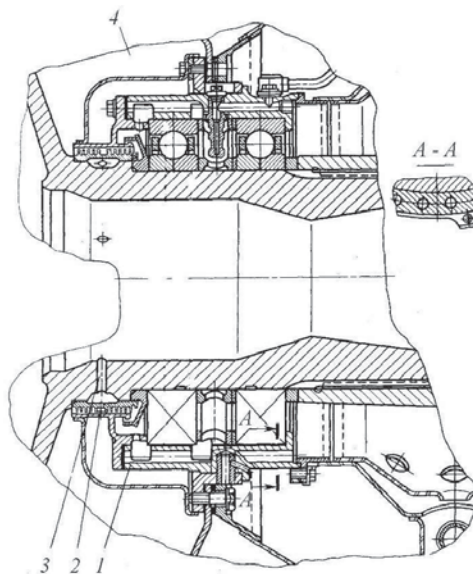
Support with reduced heat input into the bearing cavity [15]
